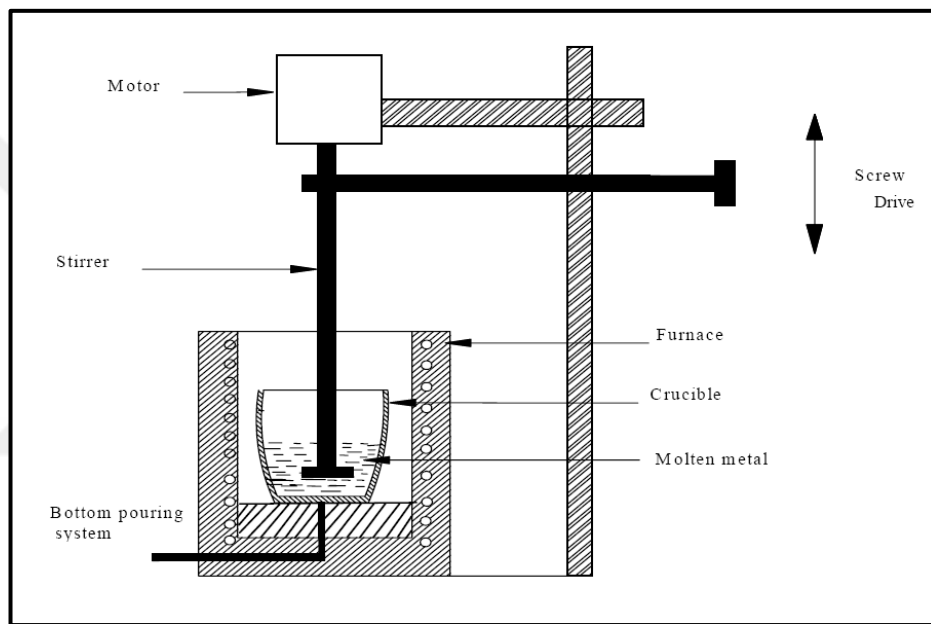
Stirring casting furnace which is used for purposes MMC [23].
